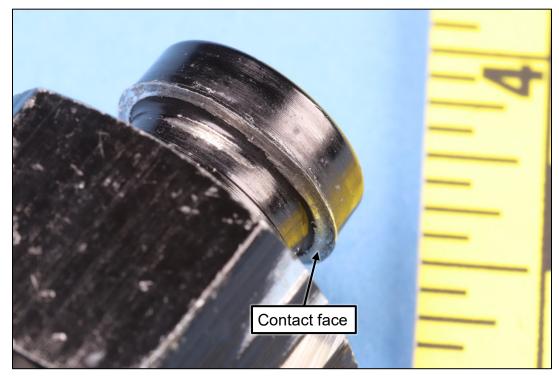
Retaining ring contact face on the shoulder of the adapter body after the nut was sectioned and removed.
